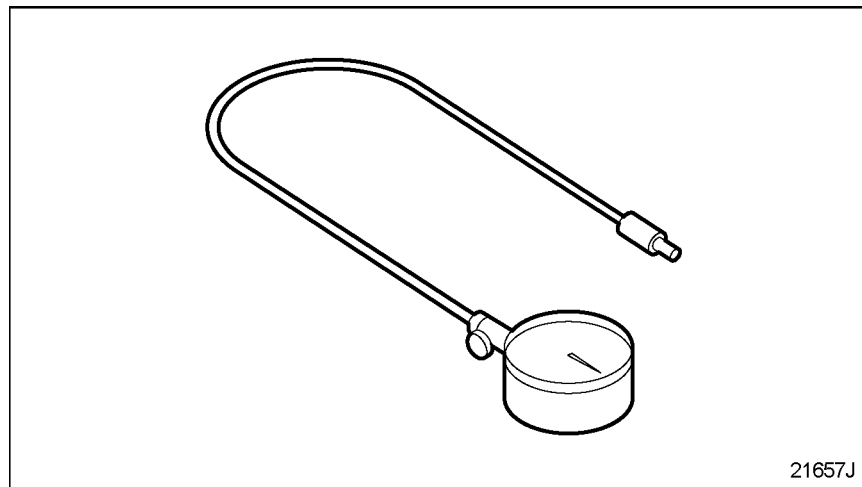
Attach Cylinder Compression Gauge J-6692-B
